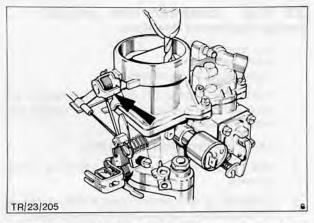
Choke mechanism held in closed position to check choke plate pull down. Adjusting tag marked
